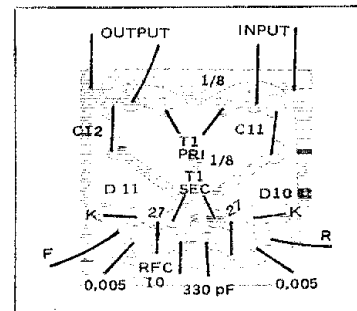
Parts placement guide for the SWR sensor. The etching pattern appeared in the "Hints and Kinks" section (page 32) of the July 1978 issue. K = the cathode end of a diode. Fractional markings such as "1/8" signify mounting holes to be drilled with that size bit.
